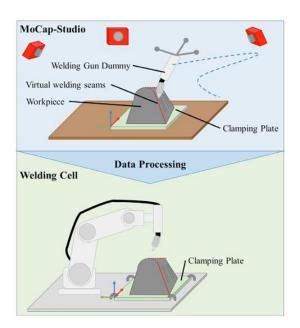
Illustration of the whole process for AR robot welding
